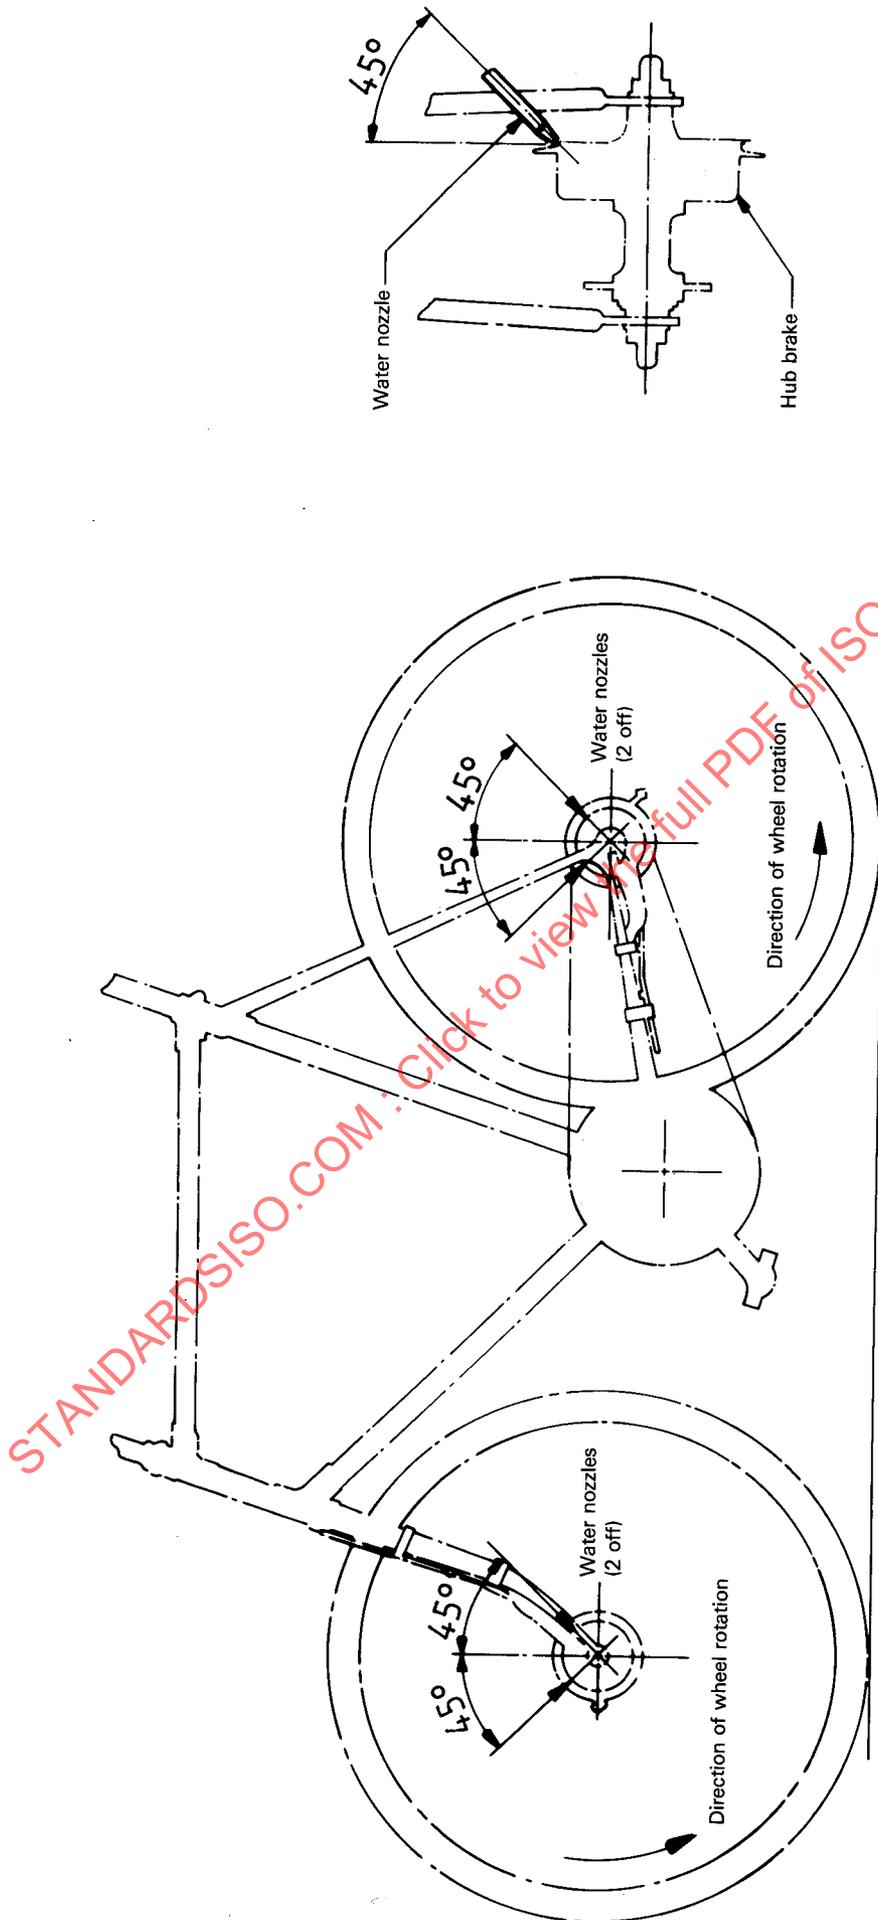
Water nozzles for internal expanding brake (front and rear)
